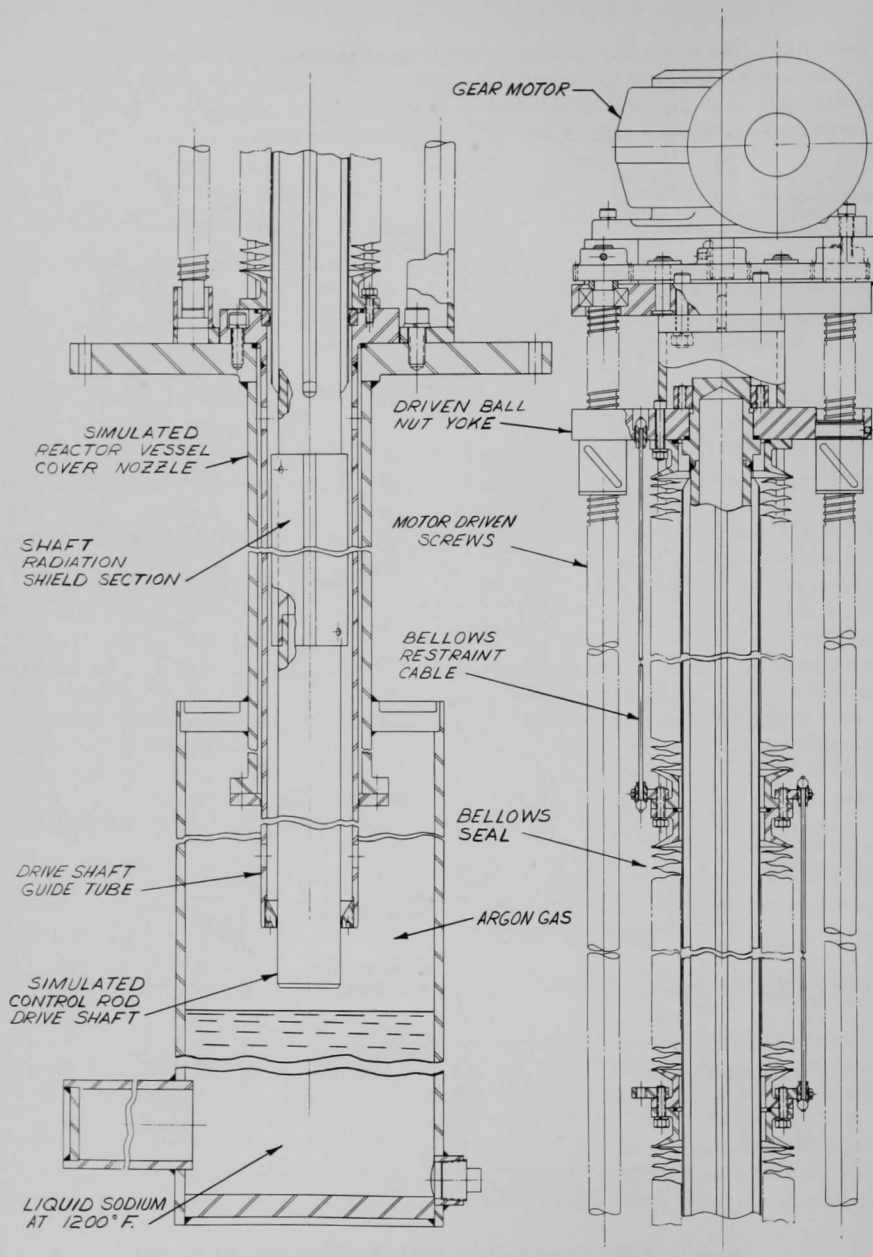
FARET Control Rod Drive Mechanism Bellows Seal Test Apparatus
